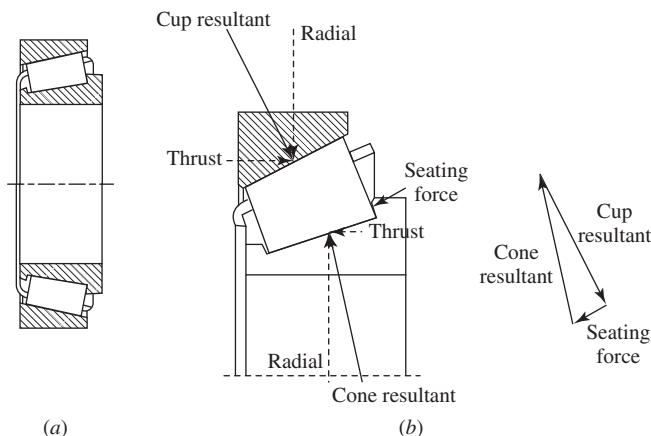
(a) Example of a tapered roller bearing, type TS (pressed steel cage). (b) The forces acting on a tapered roller. (After Tapered Roller Bearings, 6.)
